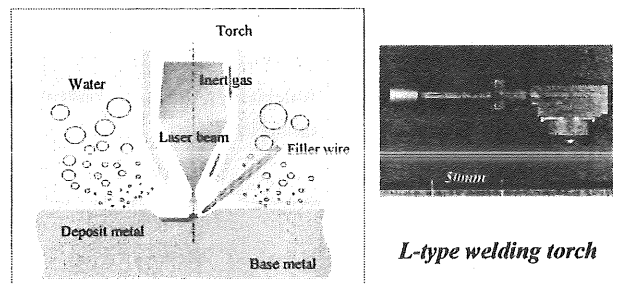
Scheme of underwater welding with YAG-laser welding
